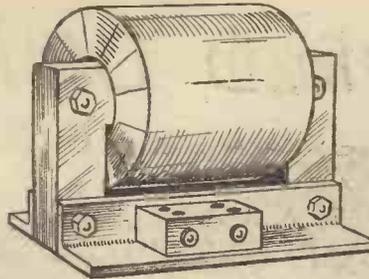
Stampings and coil assembled, showing air spaces at the sides.
